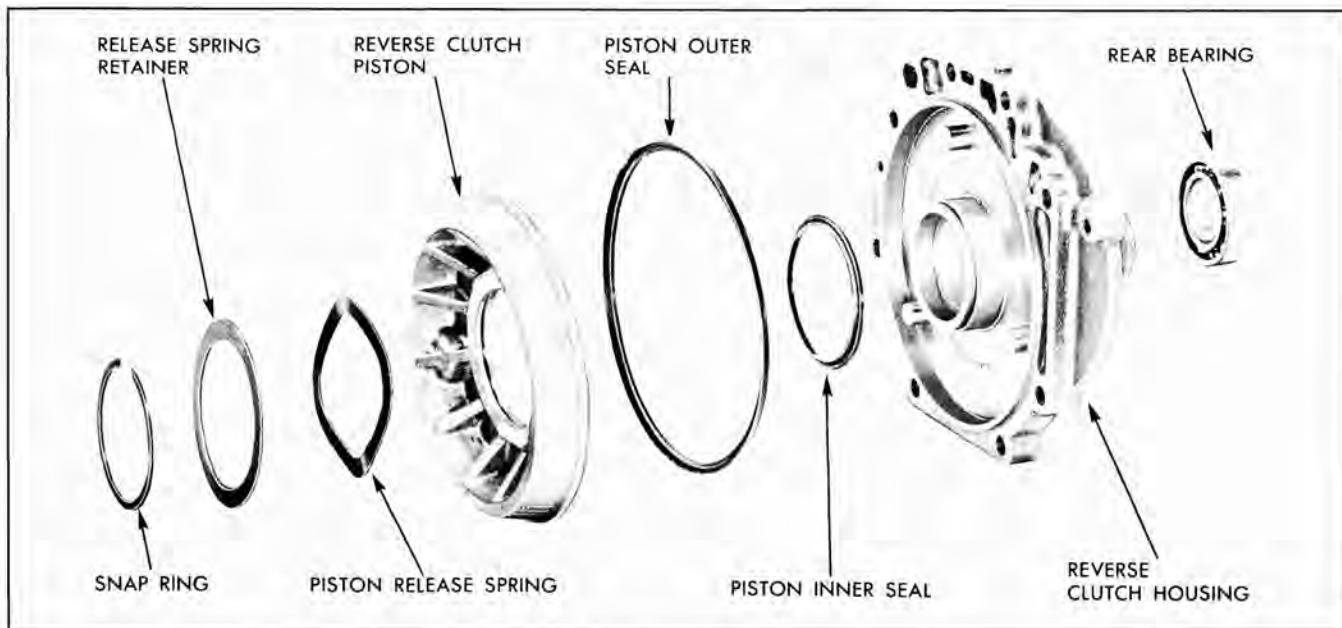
Reverse Clutch Piston, Housing and Parts—Exploded
